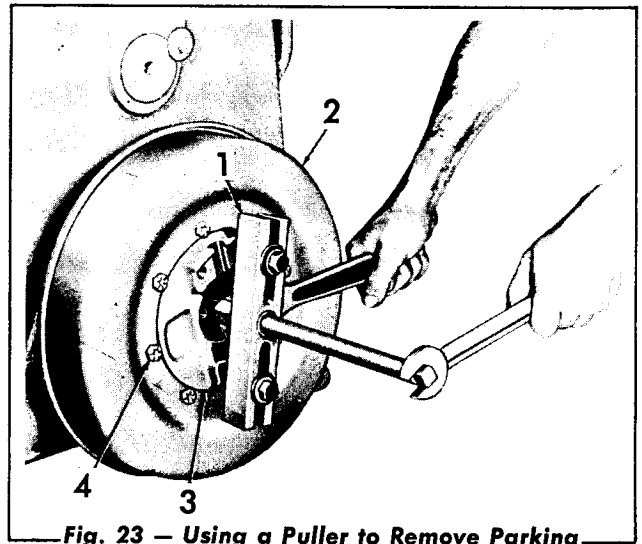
Using a Puller to Remove Parking Brake Drum
